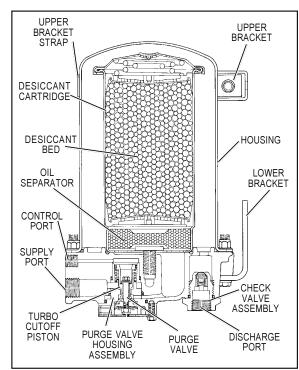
AD-9 AIR DRYER SECTIONAL VIEW
